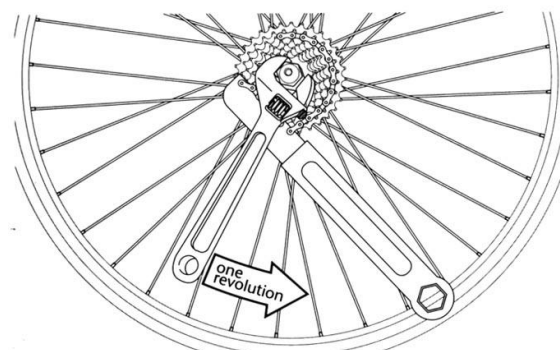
Hold the chainwhip tool in place and turn the lockring counter-clockwise.
